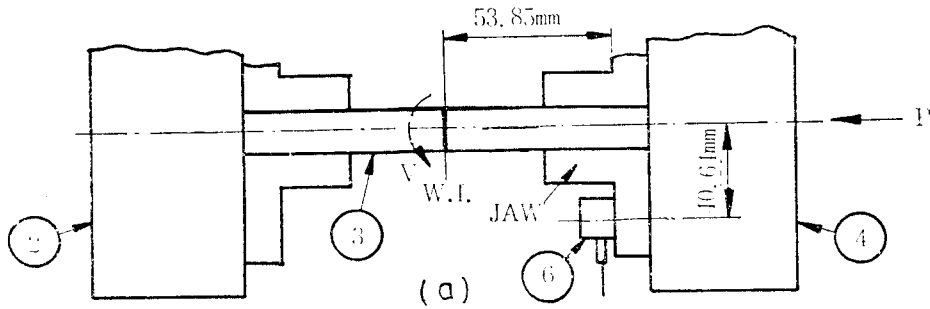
Dimensions(mm) of welding workpieces and tension test specimens.
